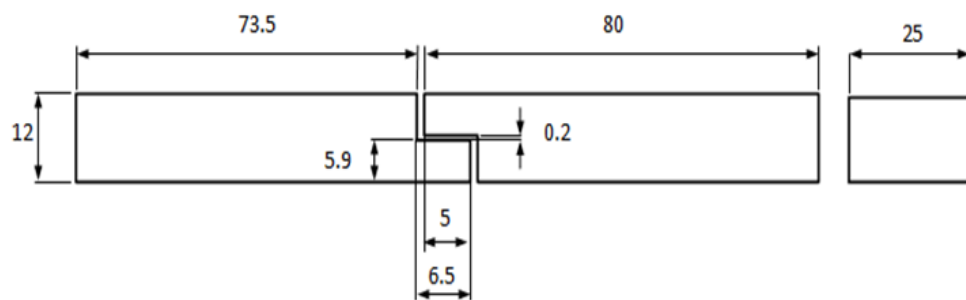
Geometry and dimensions (in mm) of the thick adherend shear test
